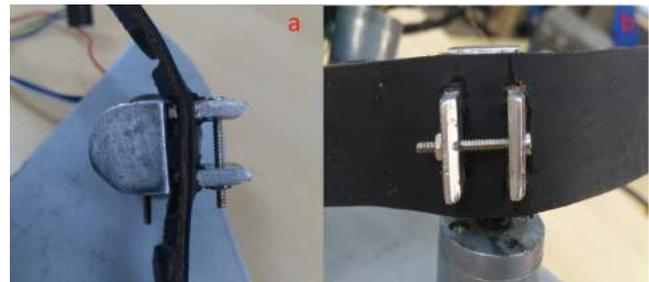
Rubber belts attached on belt holders in a) Top view b) Front view
